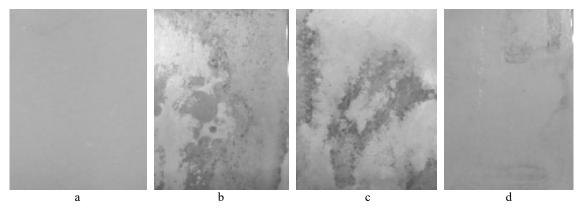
(a, b, c, d) Macroscopic aspects of some surface defects a - correctly prepared sample; b, c and d - defects caused by improper surface cleaning (1:2)
